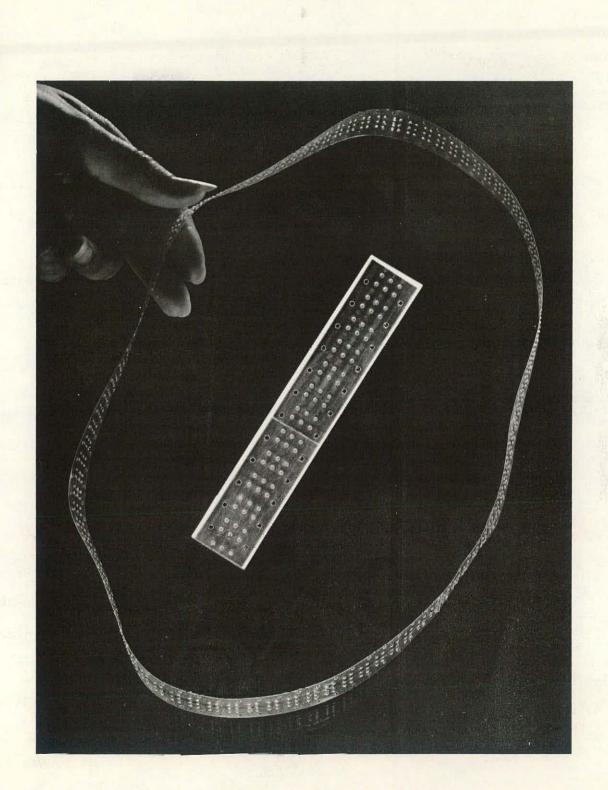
Endless reading belt. Central image shows actual size of a belt section with final closure weld. The stock thickness of the belt is 0.003 in.
